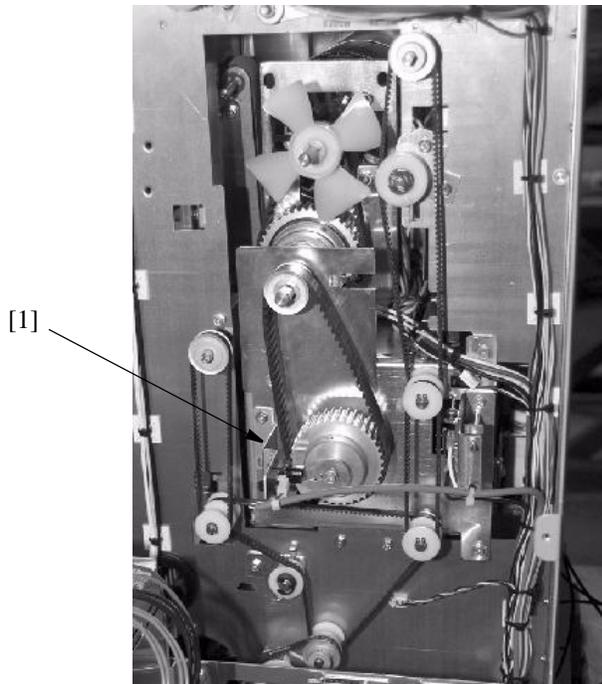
Flag Sensor Connector on Rear of the Punch.
